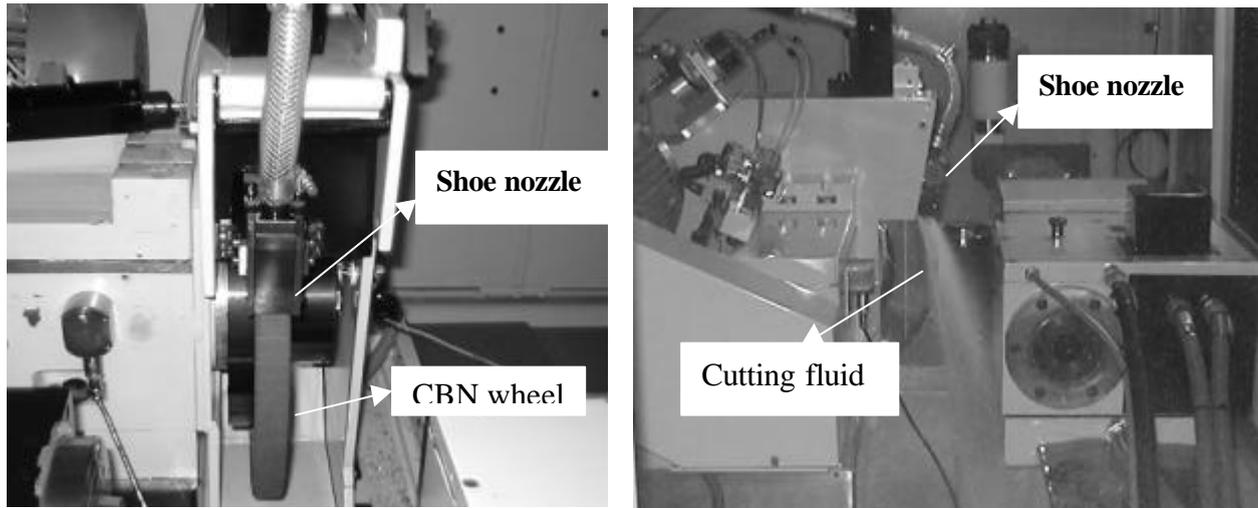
Shoe nozzle : a) frontal view; b) side view, nozzle under operation
